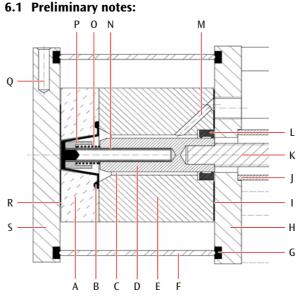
Cross-section of apparatus with measuring cell (A), conical seal (B), oil chamber (C), piston (D), cylinder (E), heat casing (F), silicone seal (G), end plate (H), square grommet (I), piston cover (J), threaded axle (K), gasket (L), manometer connection (M), guide tube (N), spring (O), sleeve (P), hole for temperature sensor (Q), circular grommet (R) and valve plate (S)
